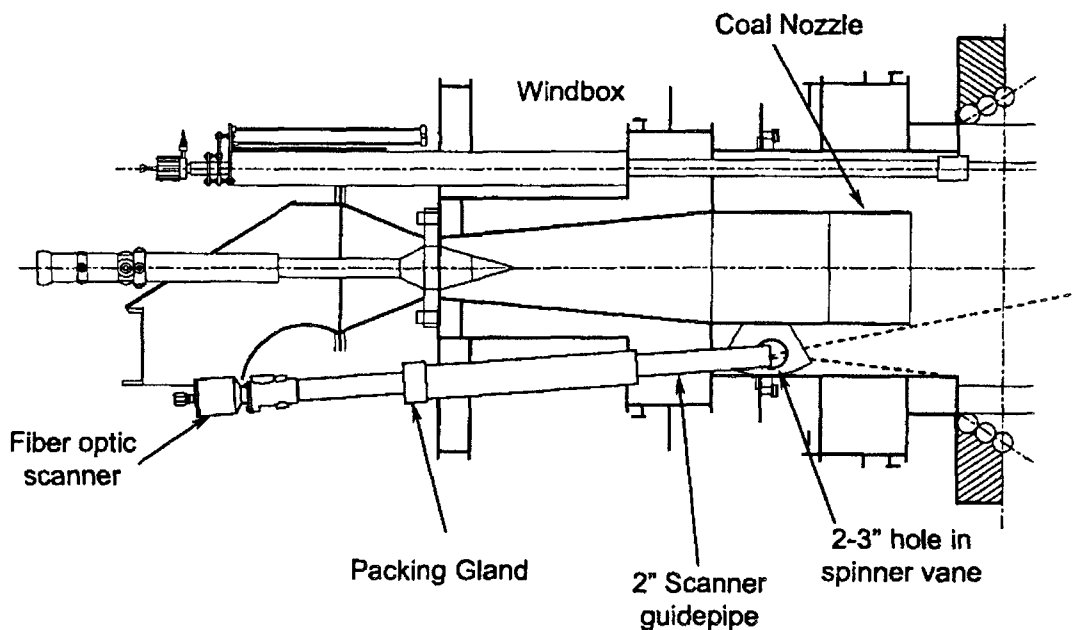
Typical Fiber Optic Scanner Installation - Wall Fired Burner
